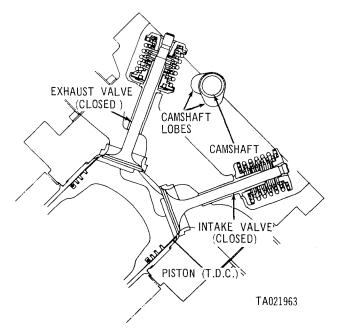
Correct position of camshaft lobes (cams) for fuel injection pump installation - sectional view.
